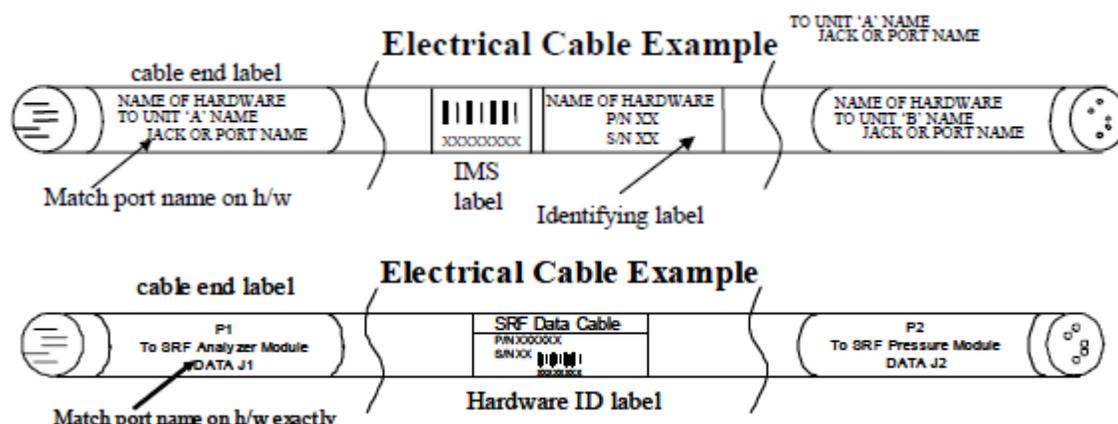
SAMPLE ISS ELECTRICAL CABLE LABELING
